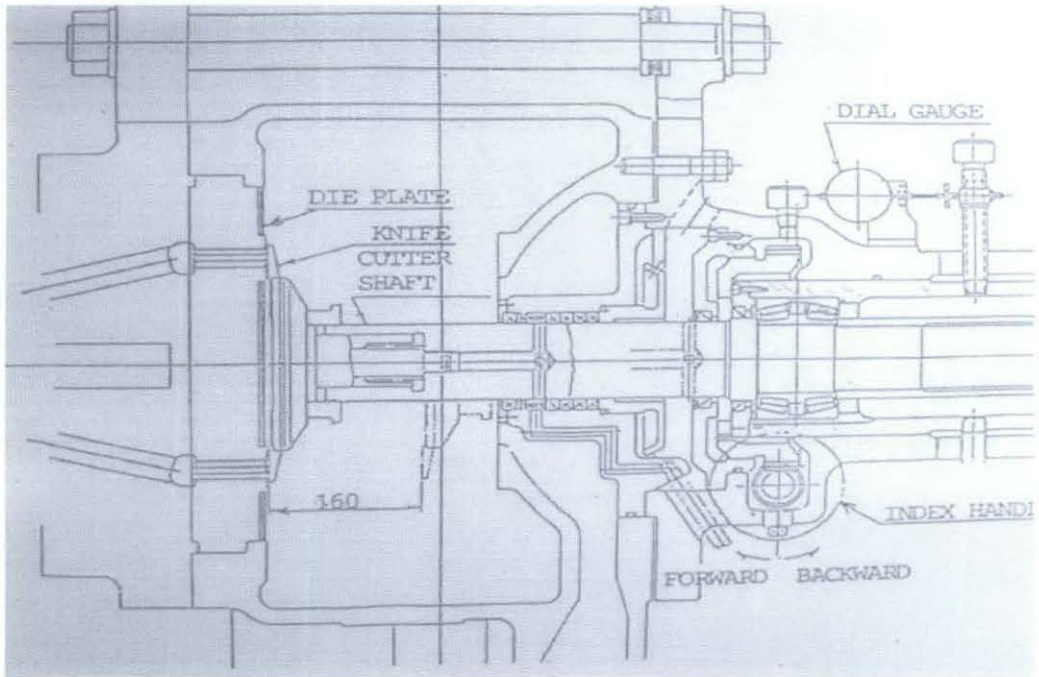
Detail view of the position of cutter blades and the die plate<sup>1</sup>.
